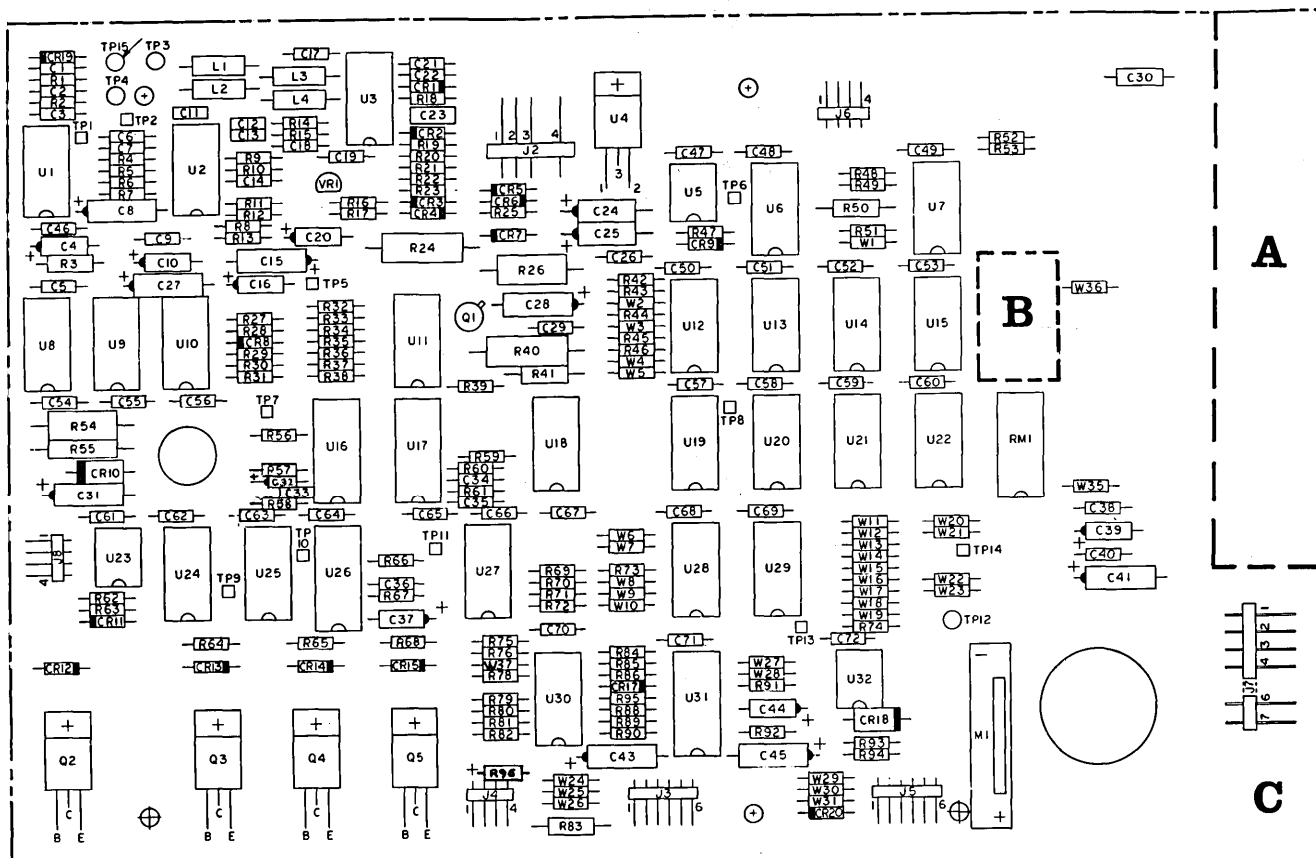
Assembly and Parts List (Sheet 1 of 5)
